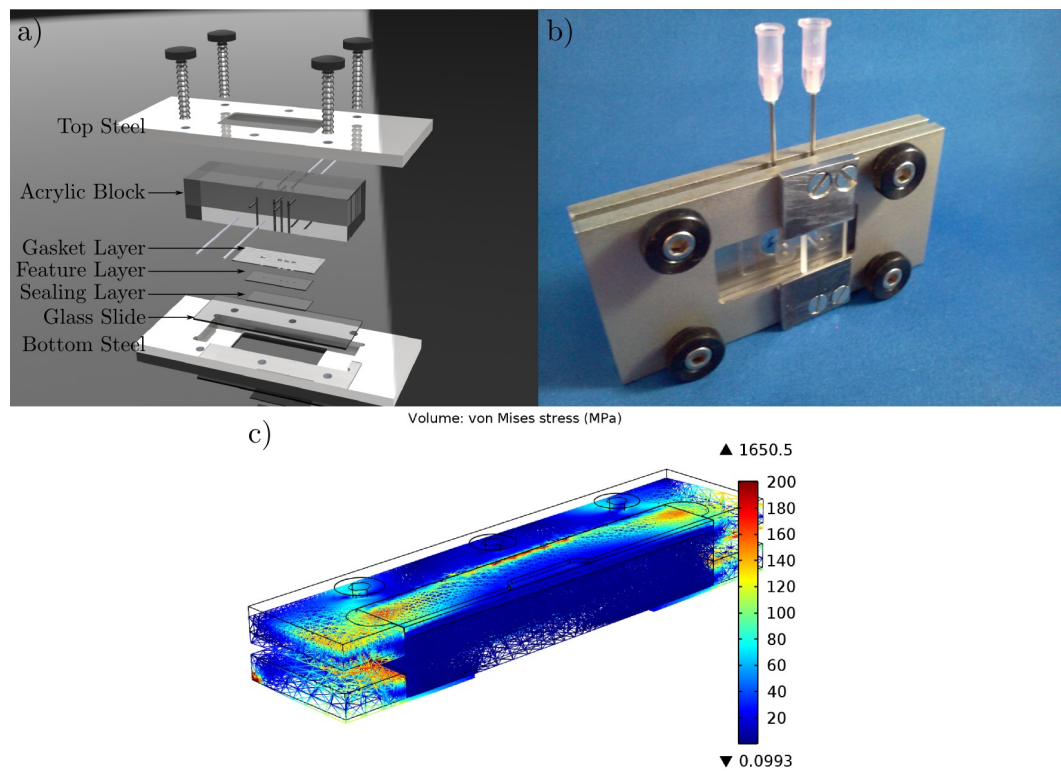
a) Rendering of the jig to seal unbonded devices together for testing. The unbonded devices face down onto a flat extruded plastic of the same type. b) Machined jig, modified slightly for pressure control of flow rates with an additional acrylic capping layer. c) Simulation of stresses in jig during max applied forces run in COMSOL. Some iteration was necessary to prevent unmanageable stresses on the glass slide which result in fracture.
